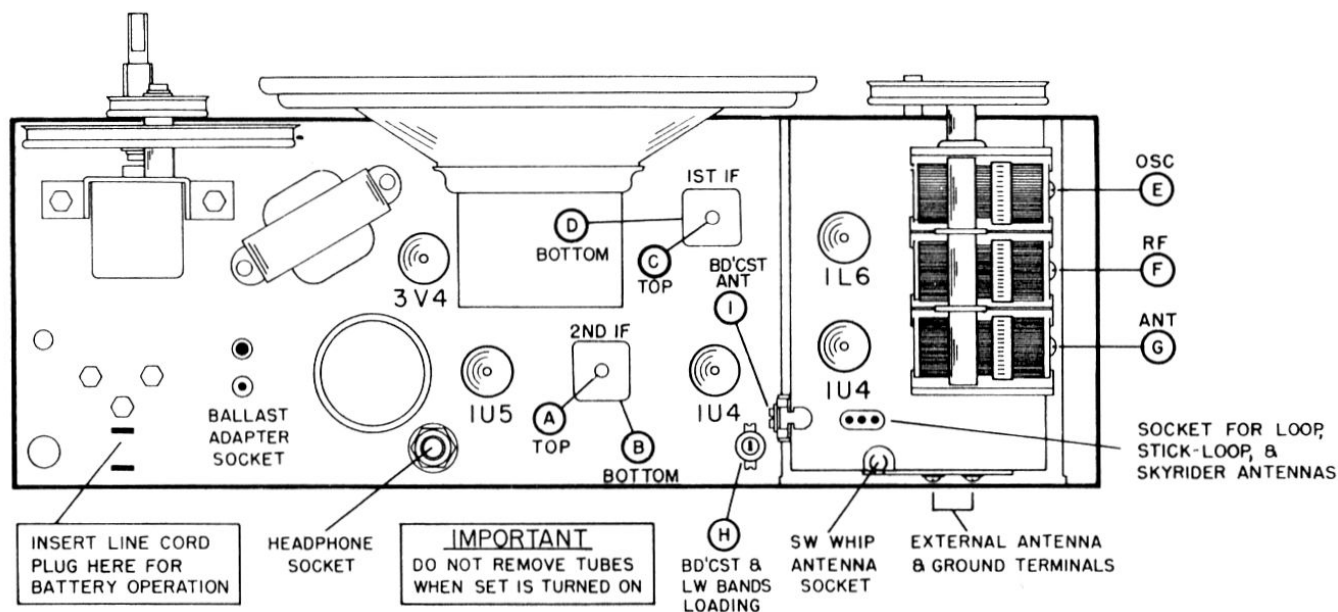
Top View of Chassis Showing Location of Alignment Adjustments and Tubes
